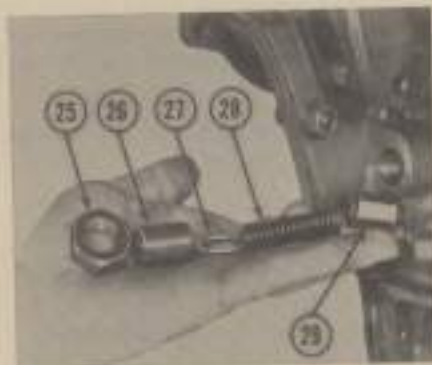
Oil pressure relief valve exploded from left front side of the diesel engine cylinder block.
